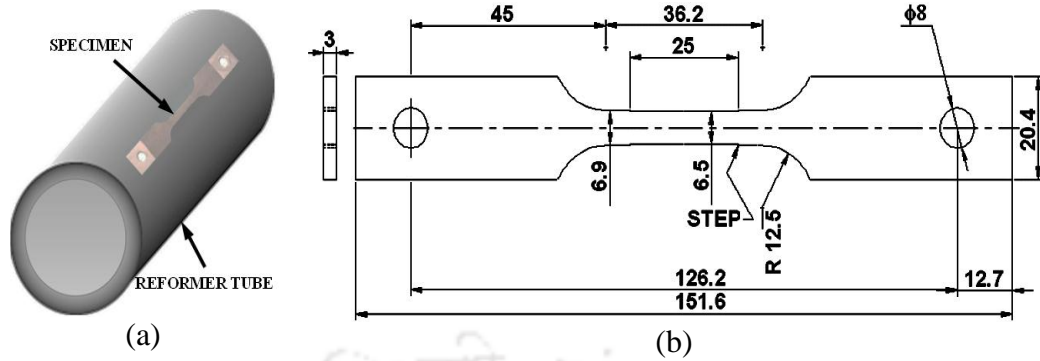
(a) Flat creep specimen machined from reformer tube and (b) schematic of the flat creep test specimen (all dimensions are in mm).
